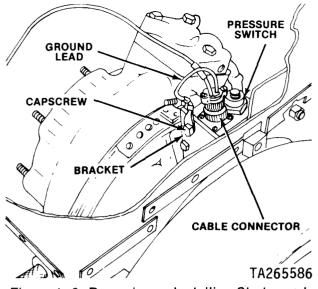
Removing or Installing Starter and Dust Detector Electrical Cable
